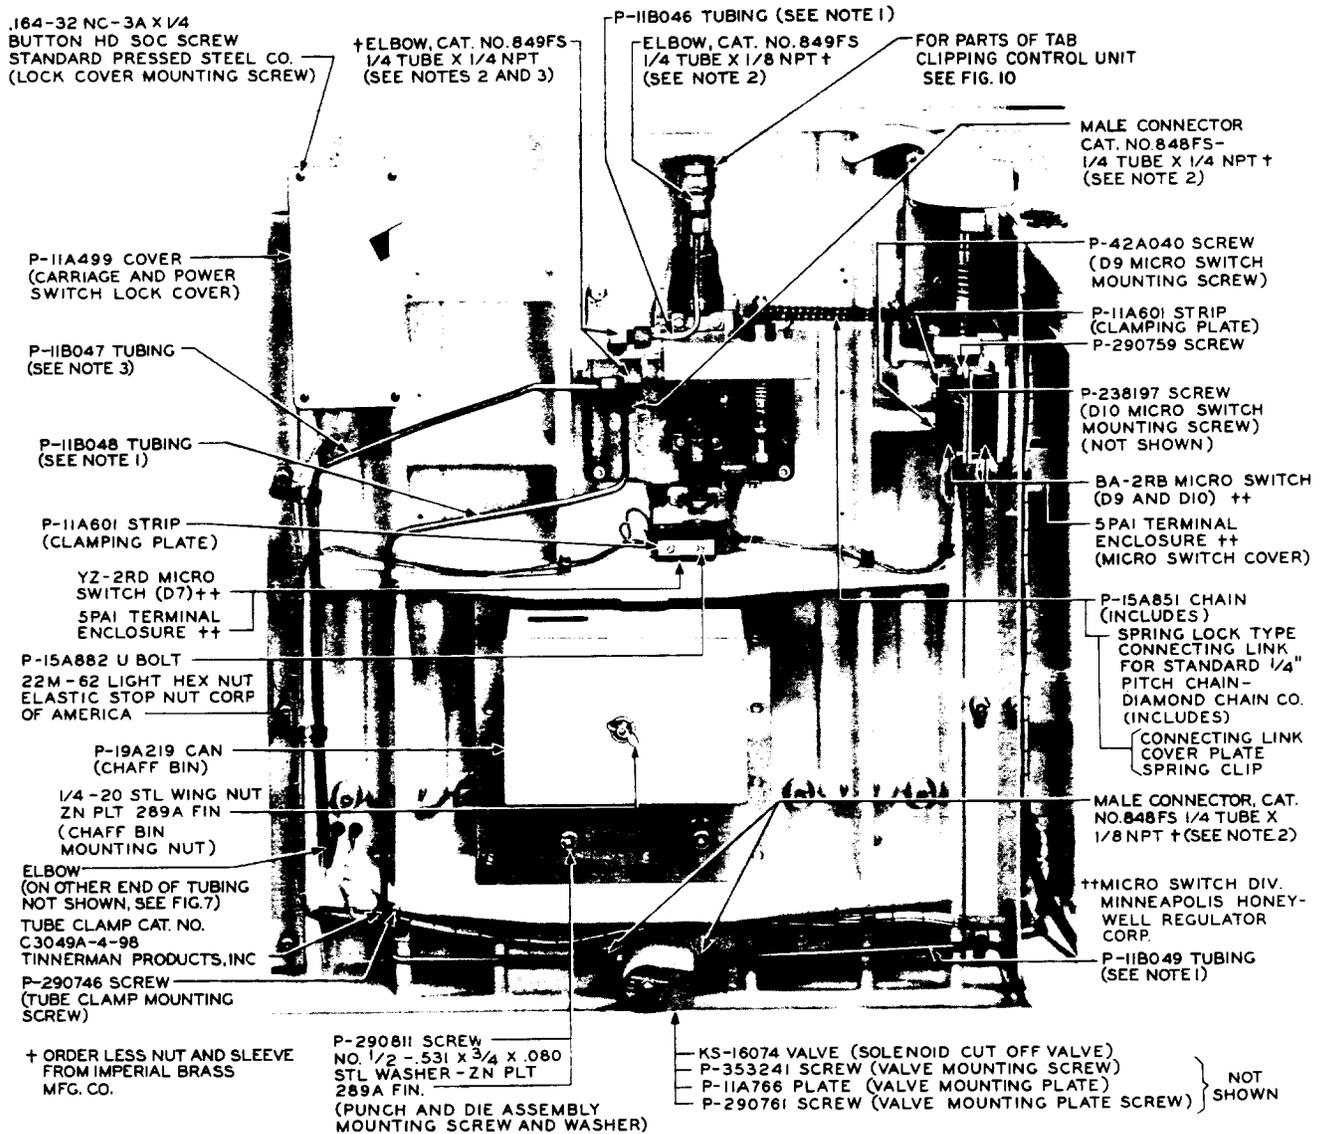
659-Type Tool — 659B, 659C, 659E, and 659F Tools Shown
